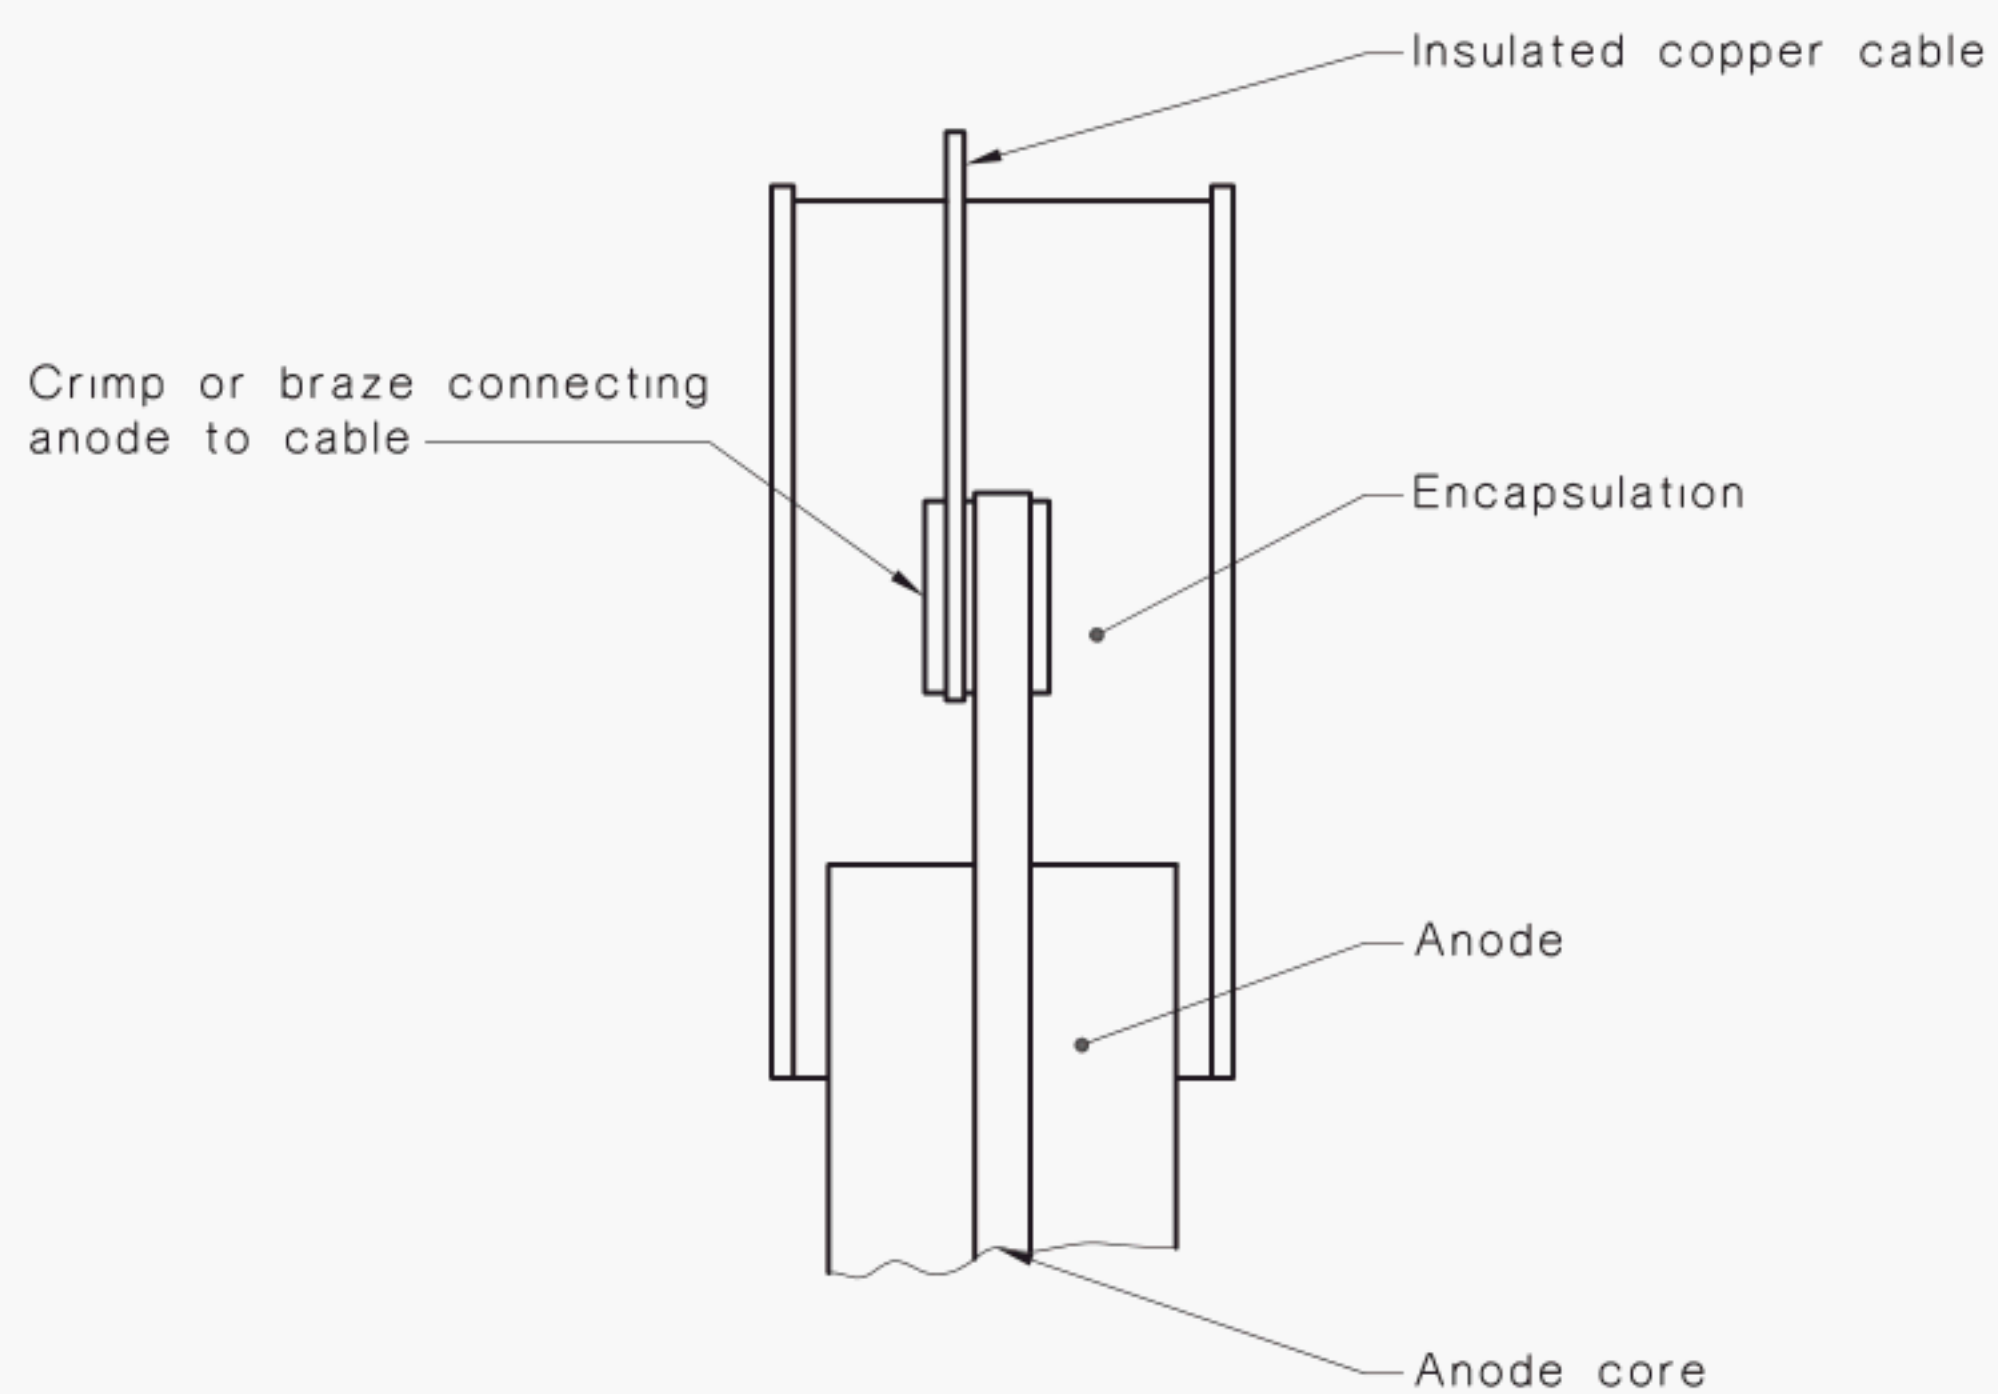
METHOD OF CABLE ATTACHMENT USING CRIMPING OR BRAZING
